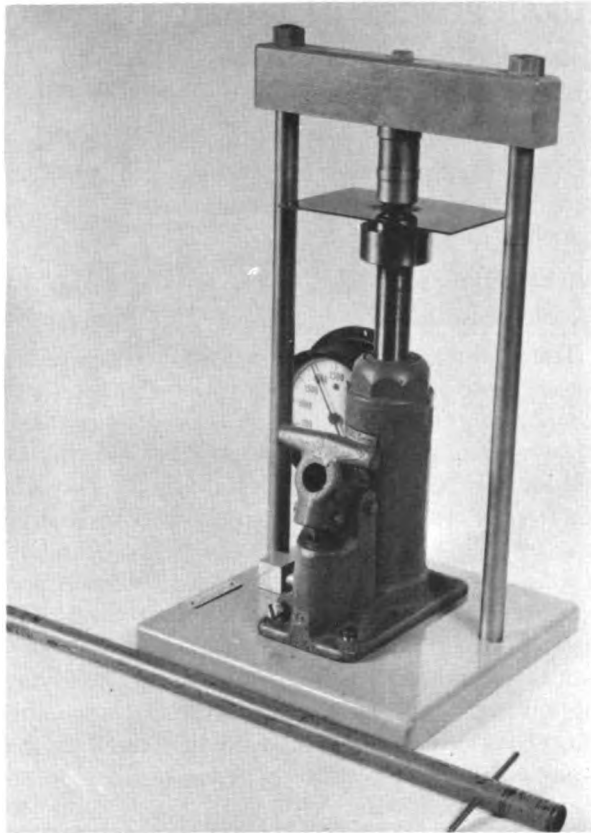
Specimen-deforming apparatus for adherence test. An enameled sheet steel specimen 4" x 6", is shown in position after being deformed by hydraulically pressing a 1" steel ball on the face (upper) side into a receptacle of specified depth on the reverse side. The handle of the hydraulic jack is lying in the foreground, and the hydraulic pressure that was used is indicated on the pressure gage.
